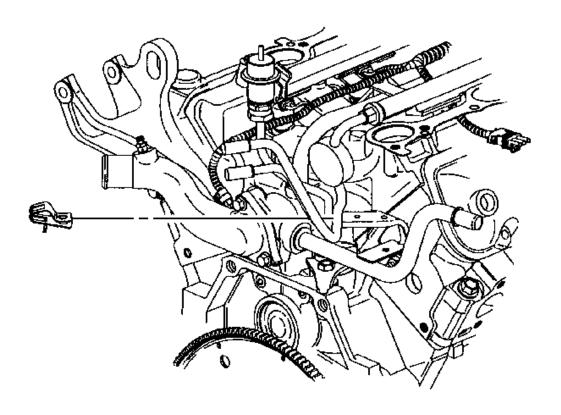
Removing Fuel Pipe Clip Bolt Courtesy of GENERAL MOTORS CORP.
